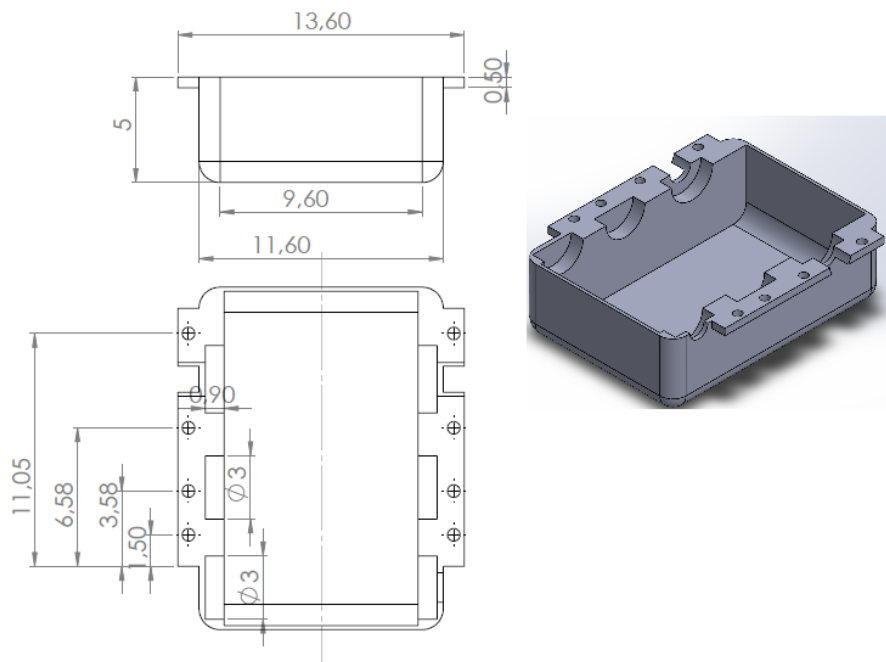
The gearbox design for shaft of rear wheel with dimensions
